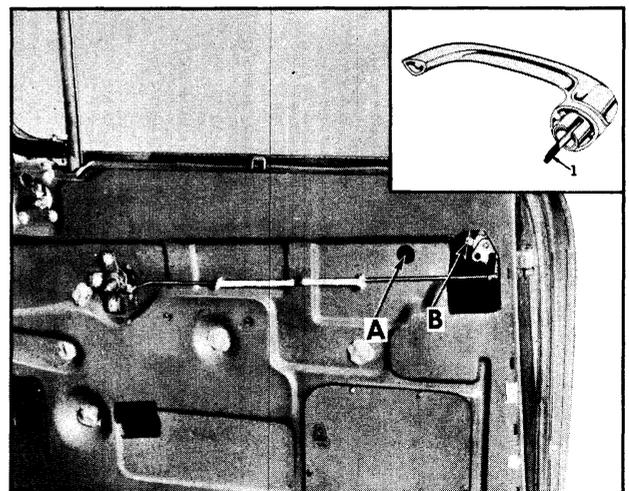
Handle Removal (All Exc. Ft. Dr. HS)
